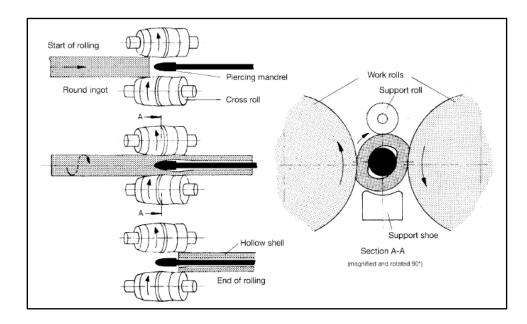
Mannesmann Piercing process: Hollow shell inside of piercer mill
